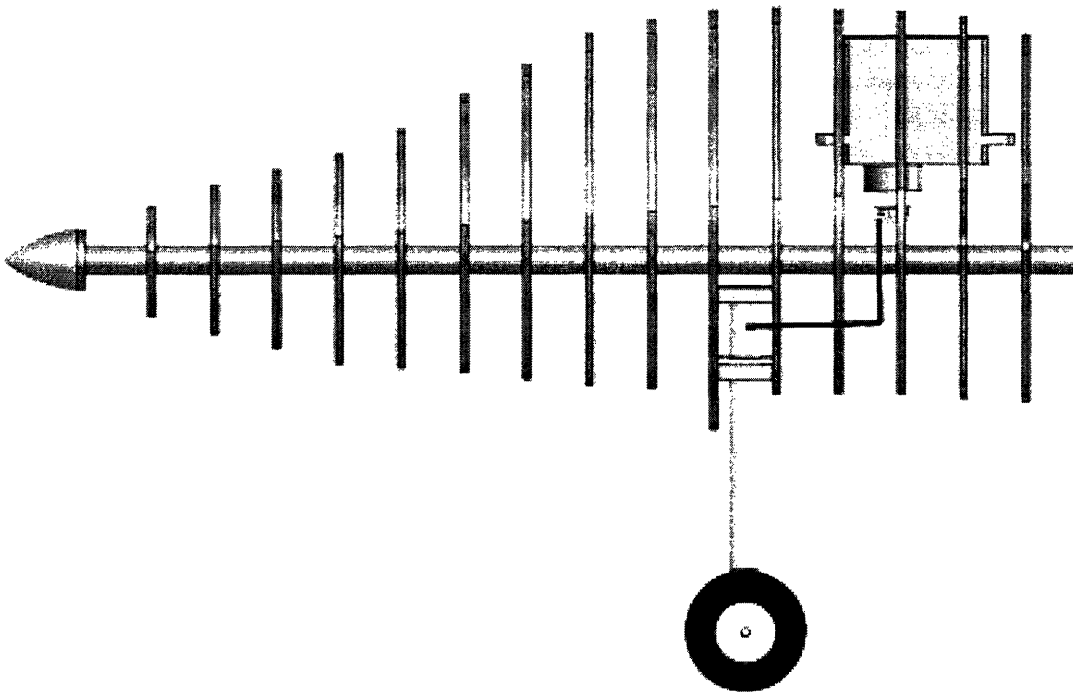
View of nose landing gear assembly consisting mainly of a swiveling axle supported by two bearings and controlled by a servo motor. Two 1" wheels were used to give the aircraft better balance as well as a symmetrical, esthetically pleasant look.
